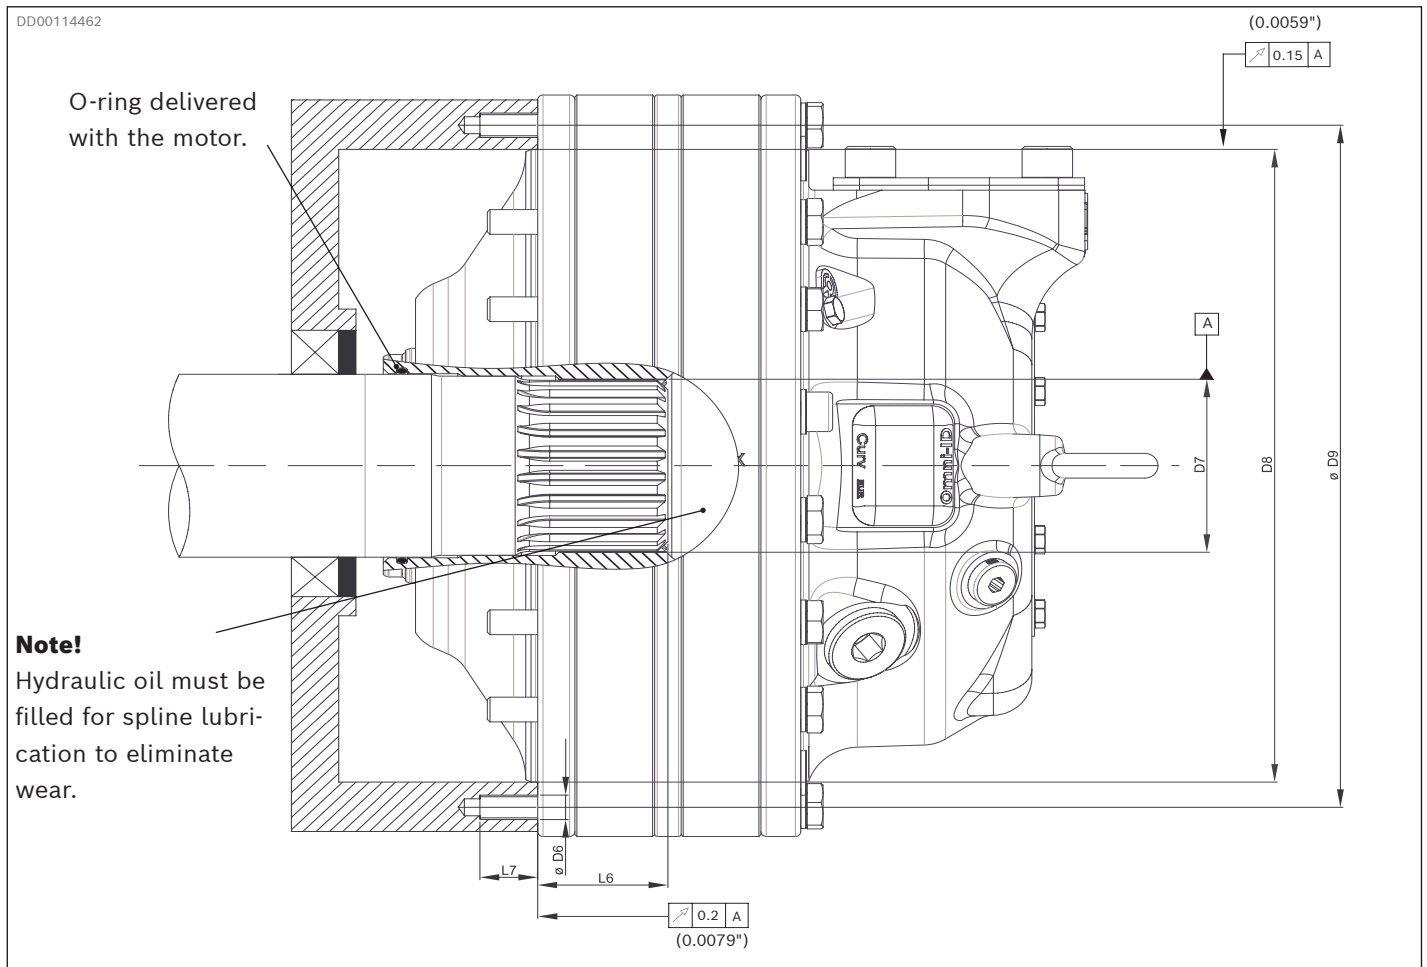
Shaft installation tolerances Atom 10, Atom 20, and Atom 30 F (front flange)
